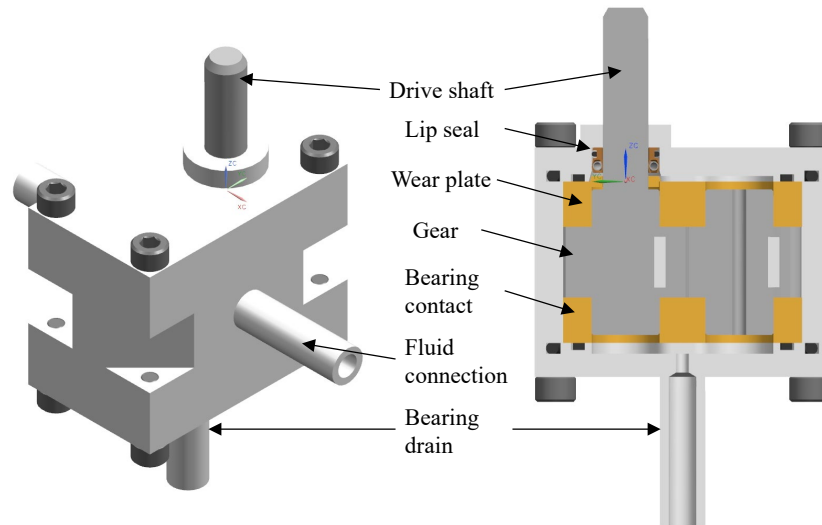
CAD model of example gear pump. Exterior view (*left*) and cross-section view (*right*)
